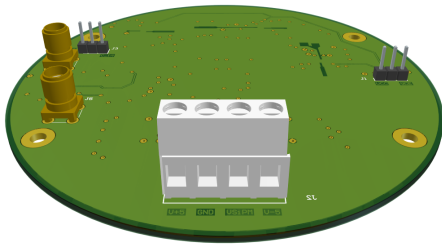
3D image of the bottom of the final UWOCS receiver PCB.
